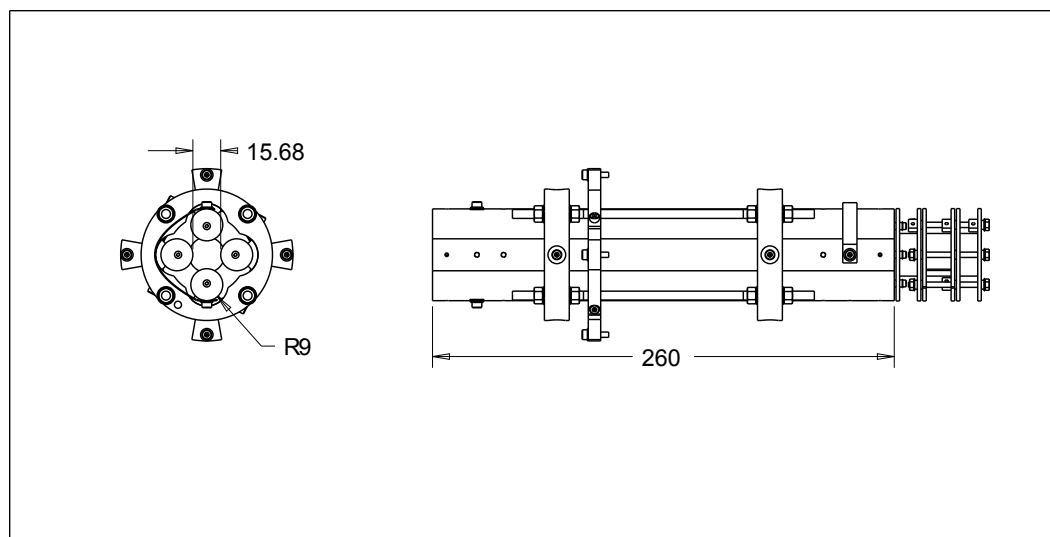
Technical drawing of the second quadrupole. The length of the second quadrupole is 260 mm. It is manufactured of cylindrical rods of stainless steel with a radius of 9 mm. The enclosed radius of the four rods is 7.84 mm. At the right end of the quadrupole an Einzel-lens is mounted. The middle electrode of the lens is divided into two parts and it is used to tune the point of impact of the ions on the stamp of the Daly-detector.
